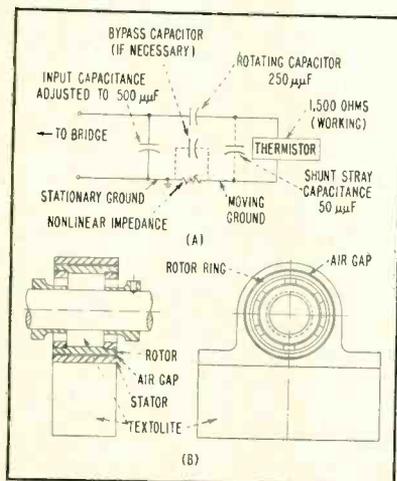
Thermistor and slip ring connections looking into bridge (A) and mechanical layout of the capacitive slip rings (B)
